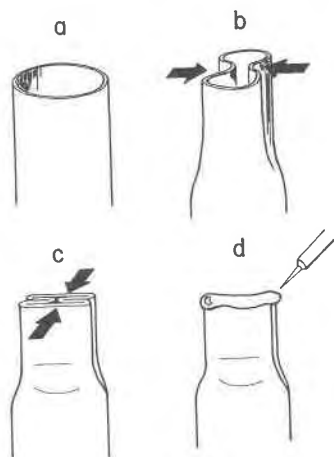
"Milk carton" crimp and weld. The initial crimp (b) is made with roundnosed pliers by squeezing in the direction indicated. The subsequent flat crimp (c) provides a closed end for easy welding (d).
